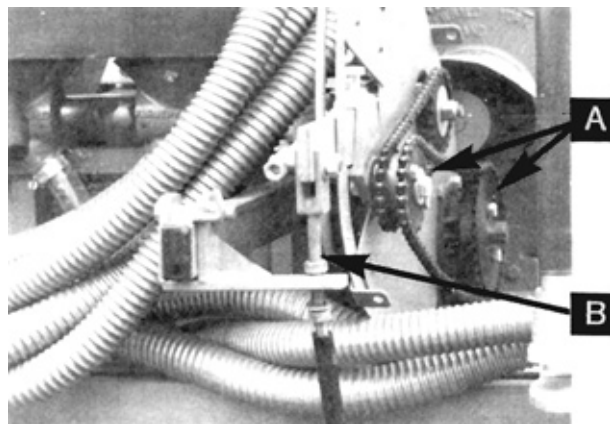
Meter Drive: (A) Change Sprockets. (B) Chain Tightener Bolt.
